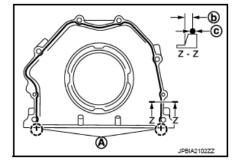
Identifying Liquid Gasket Applying Dimensions Of Rear Oil Seal Retainer Courtesy of NISSAN MOTOR CO., U.S.A.
